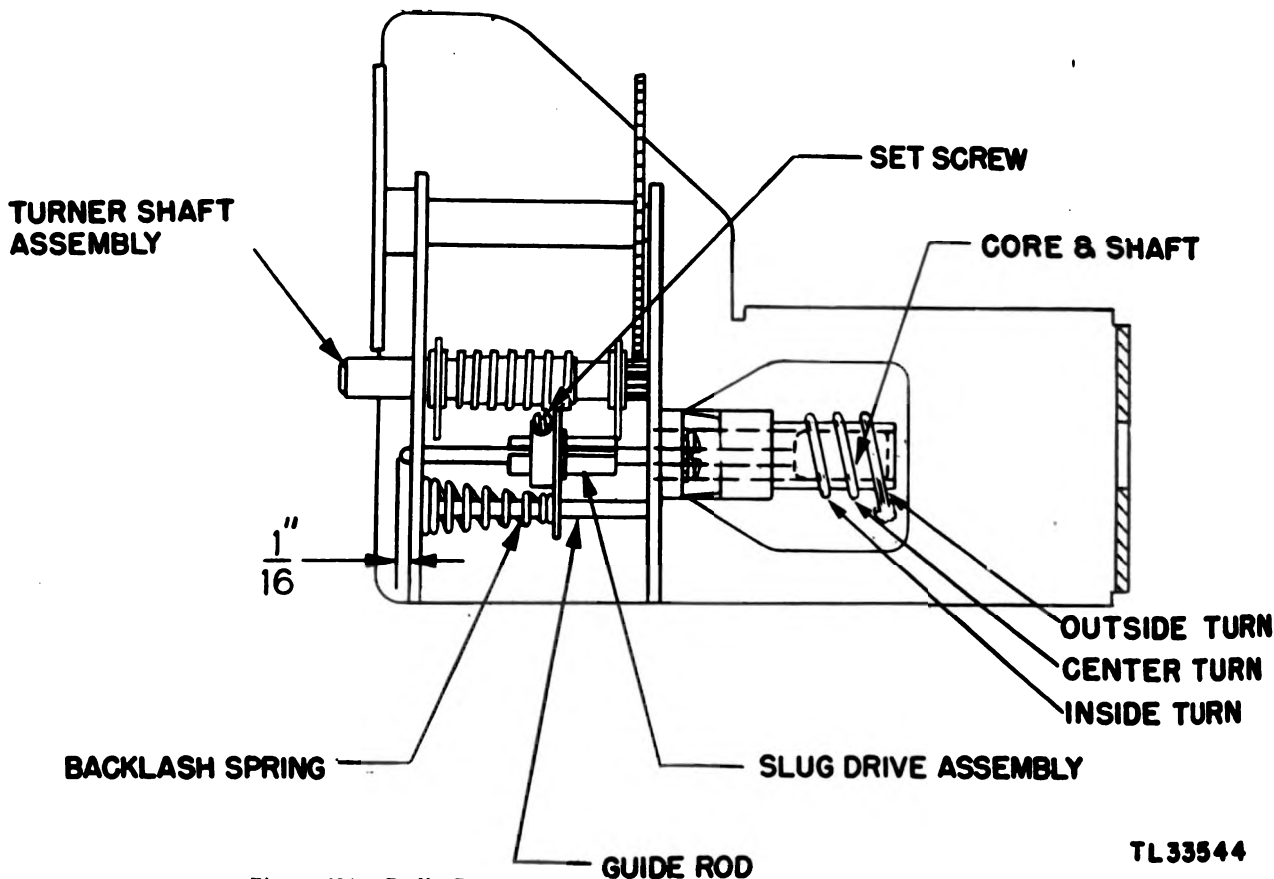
Radio Receiver and Transmitter BC-1267-A, r-f tuner assembly.
